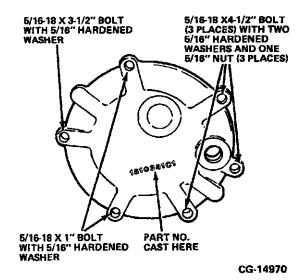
Injection Pump Access Cover Mounting Hardware Location
